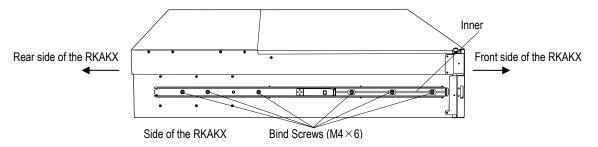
Installing the Inner (Rev.C or later)
